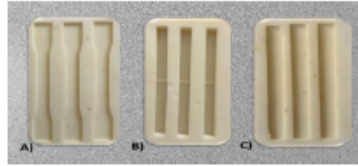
A) ASTM D638 Tensile mold, B) ASTM D256 Charpy impact test mold, C) ASTM D790 Three-point bending mold
